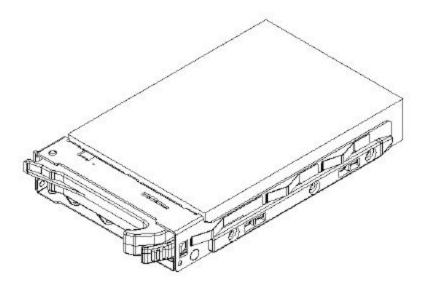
Hot-swap Drive Carrier with Drive Installed
